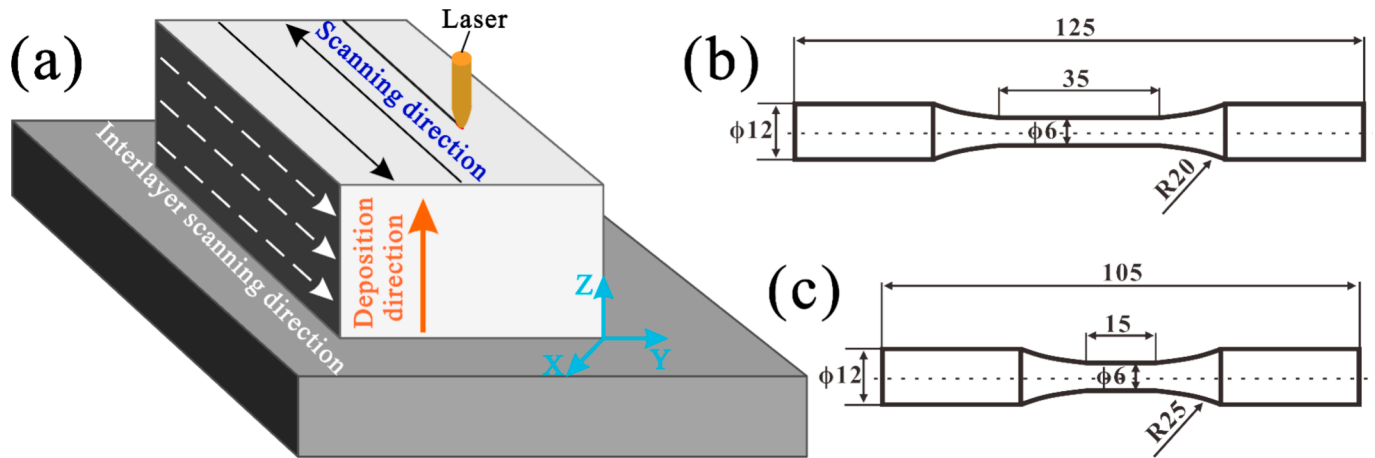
(a) Bulk HL-DED Inconel 625 manufacturing process schematics; (b) Bulk HL-DED Inconel 625 tensile specimen dimensions in mm; (c) Bulk HL-DED Inconel 625 fatigue specimen dimensions in mm.
